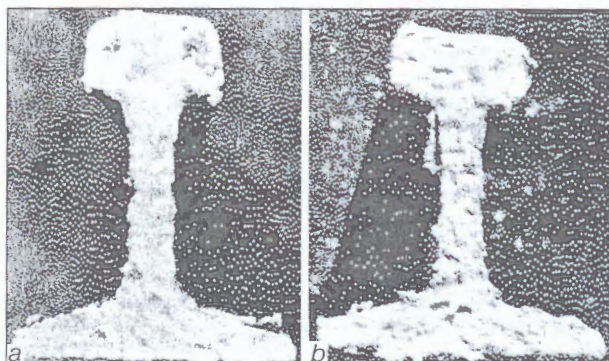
Flashing surface of R65 rails before upsetting in welding by pulsed (a) and continuous (b) flashing
